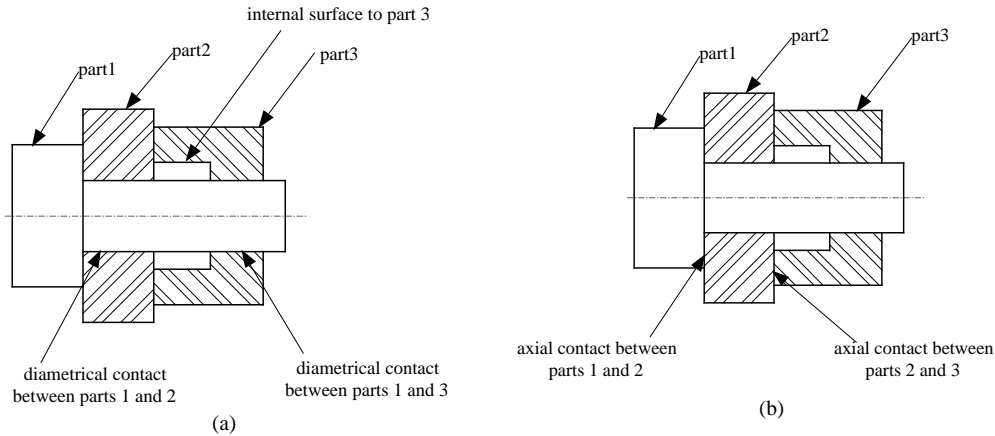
Assembly with (a) diametrical contacts and (b) axial contacts
